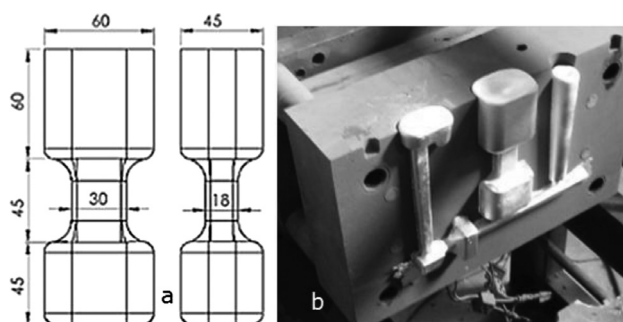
a) Casting geometry, b) solidified casting within a permanent mould
